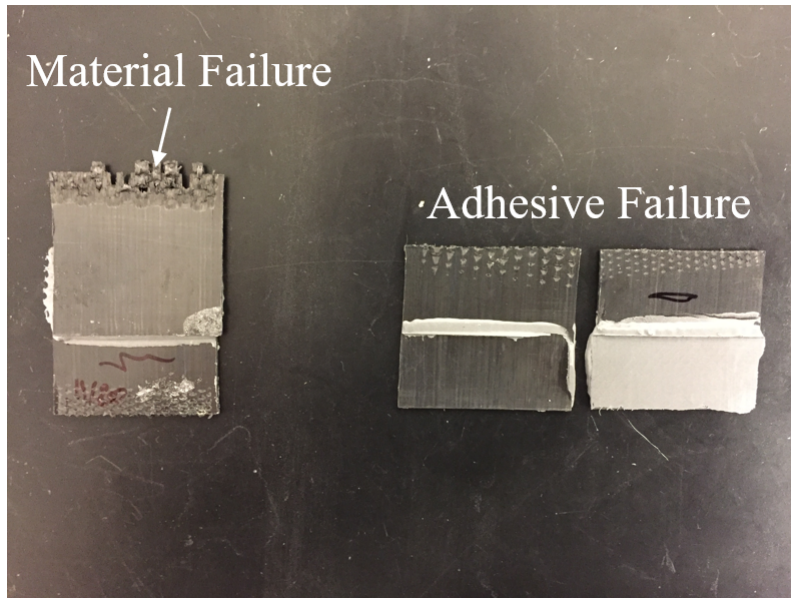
Examples of material and adhesive failures from lap-shear testing.
